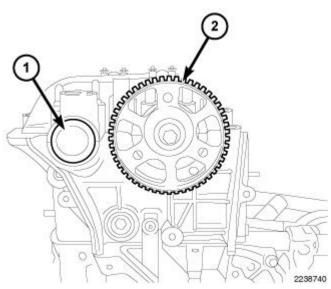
Camshaft Sprocket Courtesy of CHRYSLER LLC
